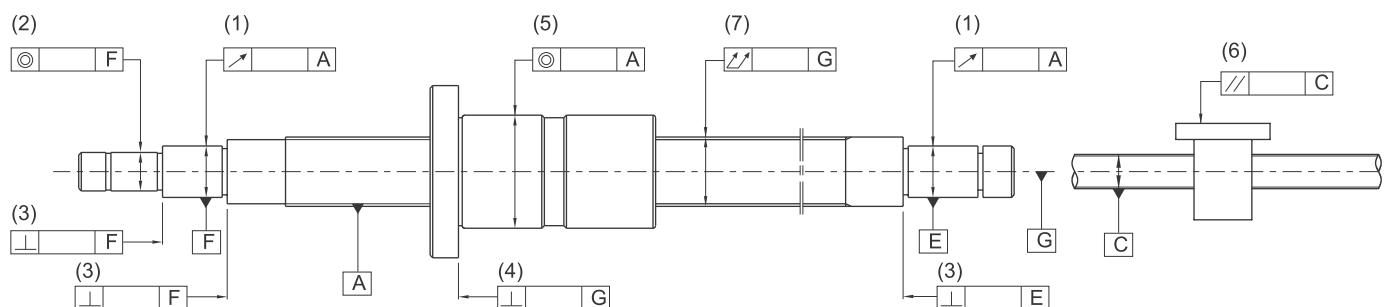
Mounting Accuracy and Tolerance
